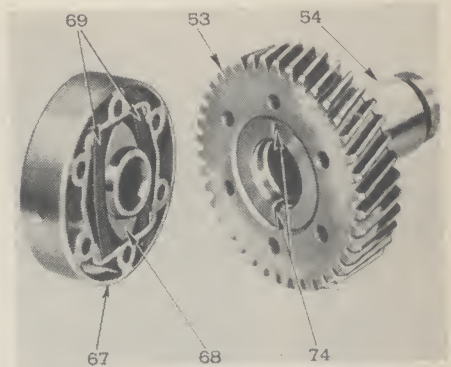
A—Relationship of GM engine blower flexible coupling drive cam (68) to oil grooves (74) which are located in blower drive gear hub (54).
